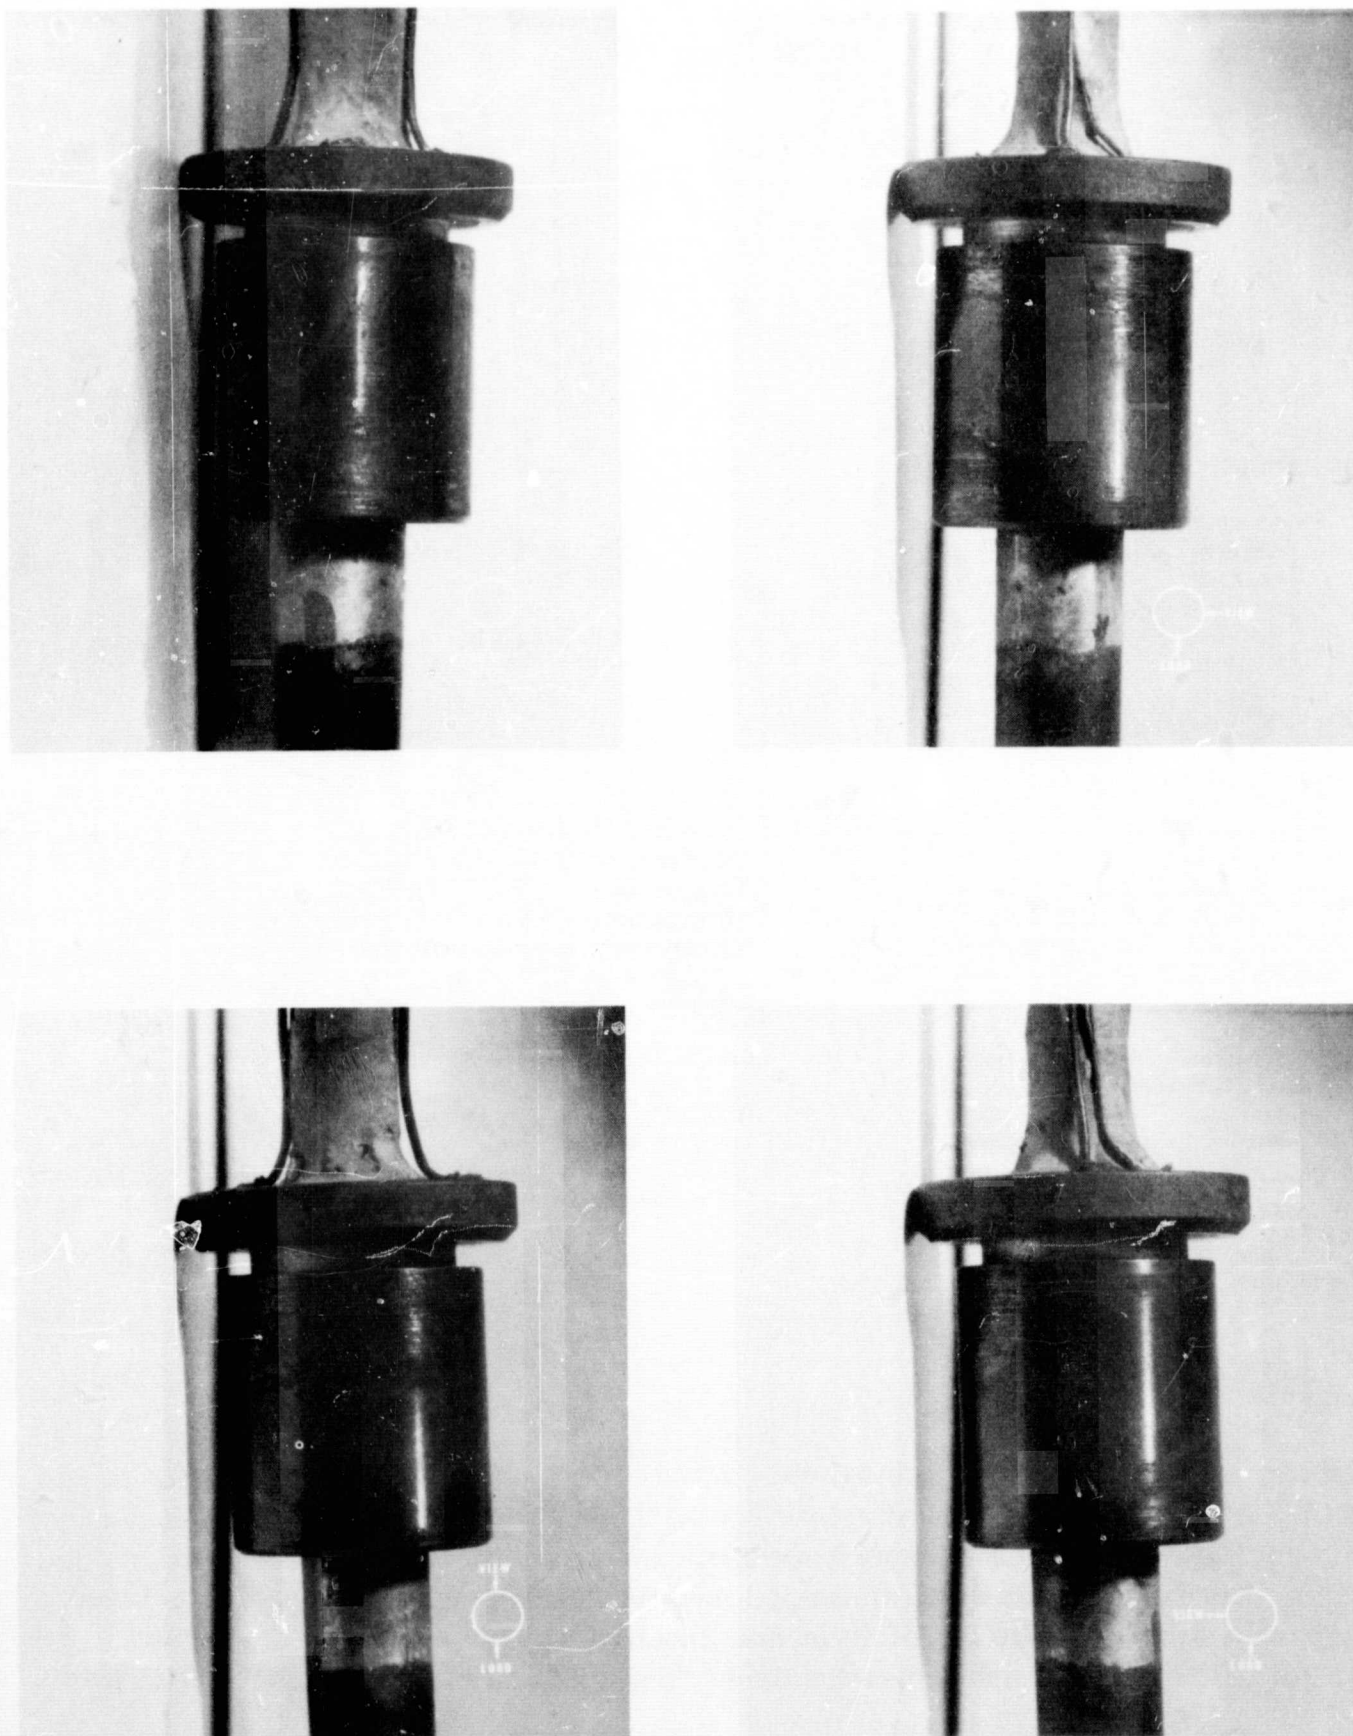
Seal Seat Bearing Area After Test Showing Scoring (Load and Viewing Directions Indicated on Each Frame) (XP-90806, XP-90807, XP-90808, XP-90809)
